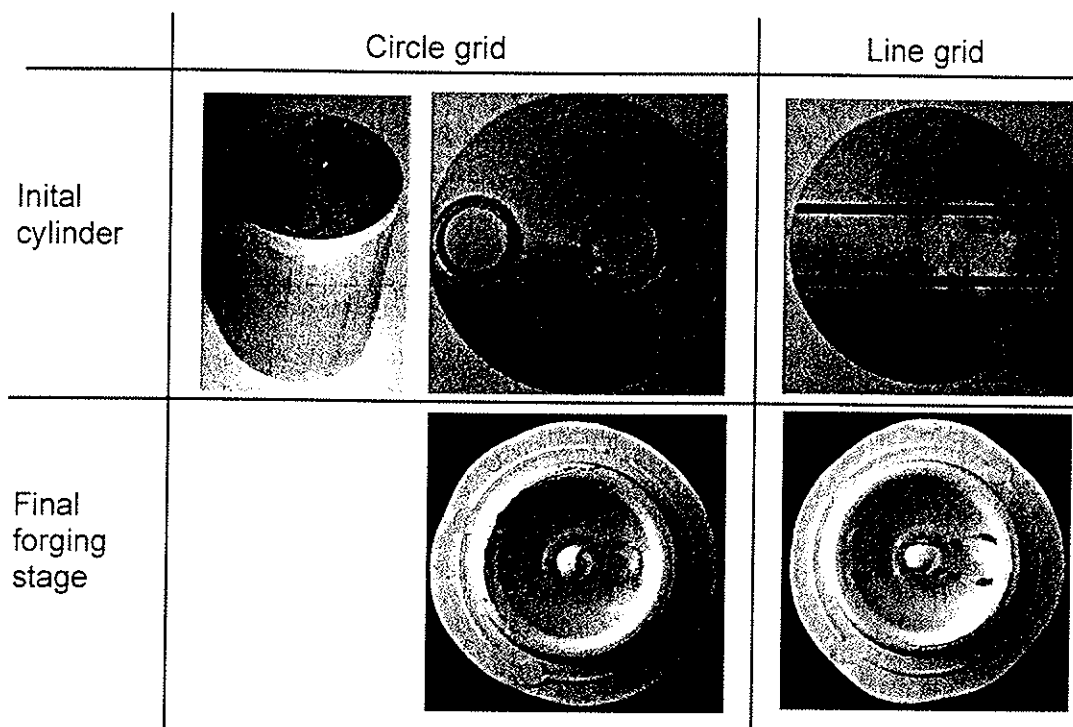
Surface grid made by laser welding of marker material sheets onto test samples. The laser is positioning the grid by an accuracy of 0.1mm [NOL 04g].
